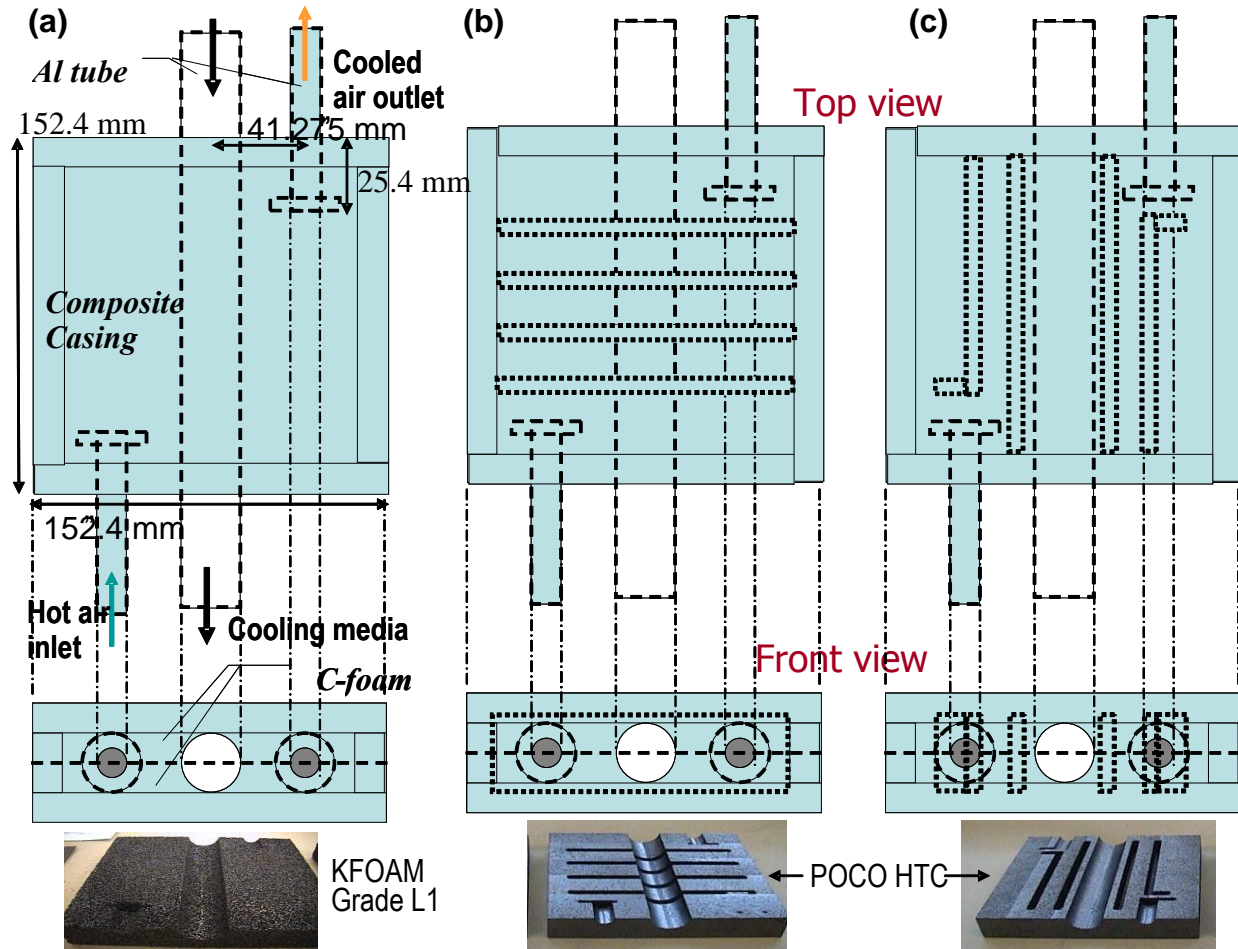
Schematic drawings of composite HX design and pictures of carbon foam used: (a) basic design (D1, D2) and (b), (c) designs with air channels in carbon foam core vertical or parallel to cooling tube (D3, D4, D6)
